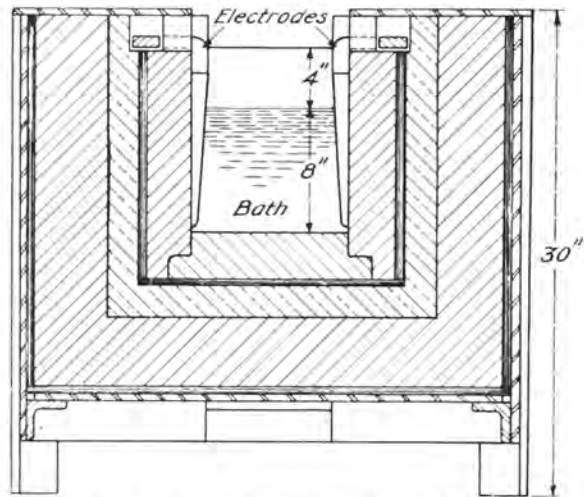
SECTIONAL ELEVATION OF FURNACE
